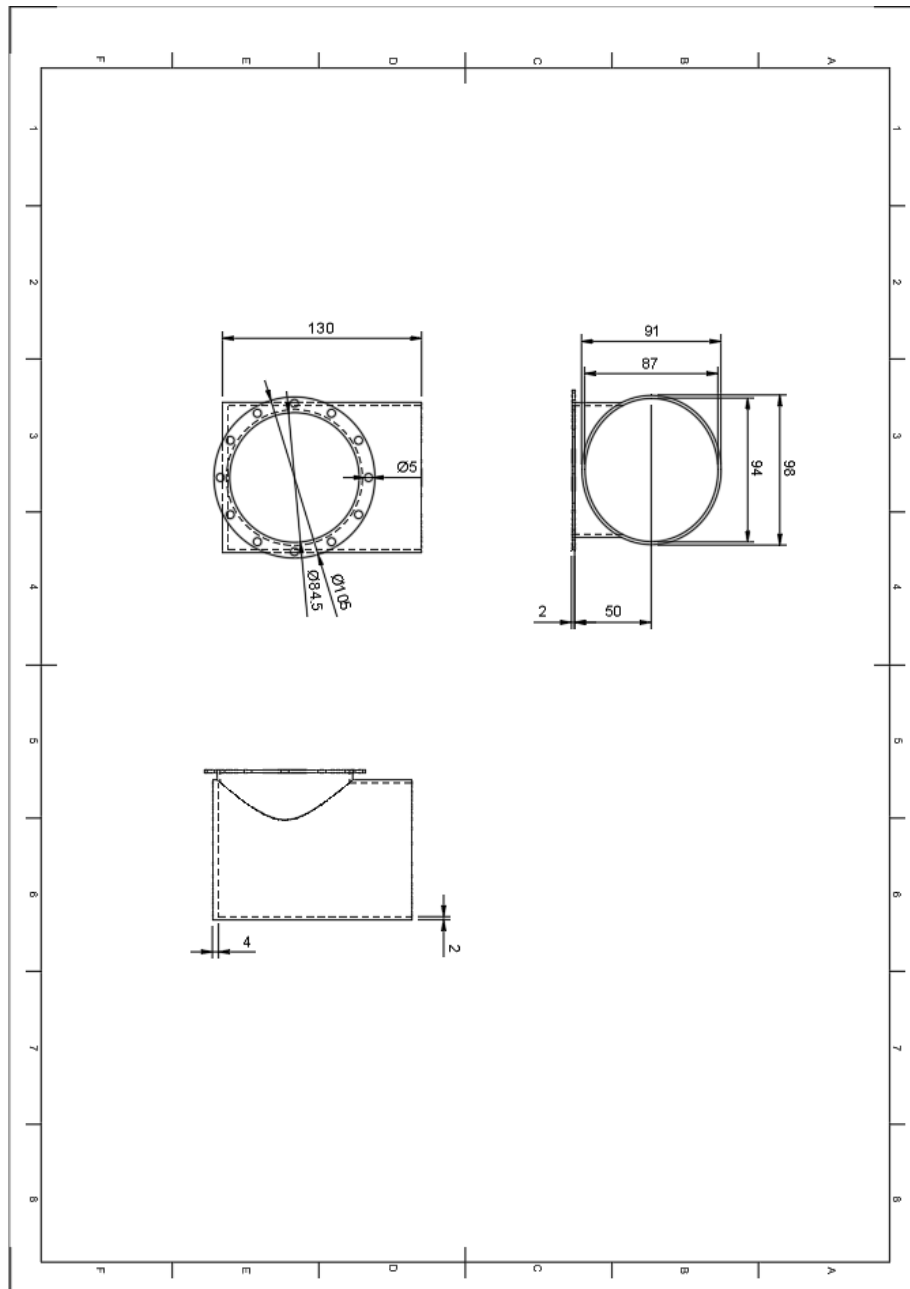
The engineering drawing of the bottom end of the spiral pipe
